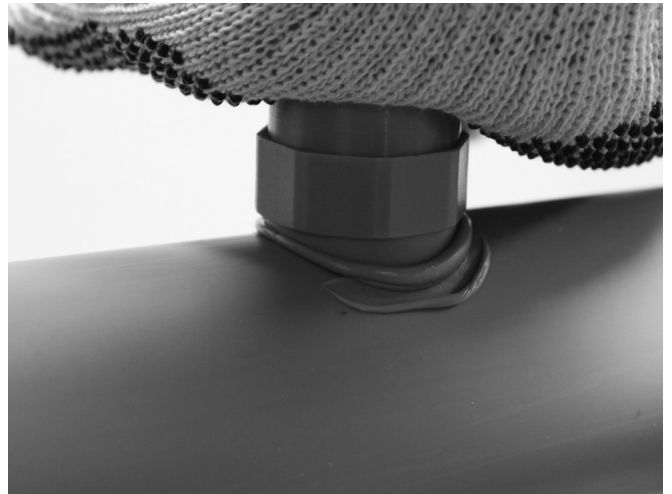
Push the connecting piece of the welding saddle quickly into the heated bore hole. Push the fitting for about 15 seconds onto the pipe. After a cooling time of about 10 minutes the fused joint can be operated under pressure. The appropriate branch connections will be assembled through socket fusion welding or by using female or male adapters with the welding saddle.
